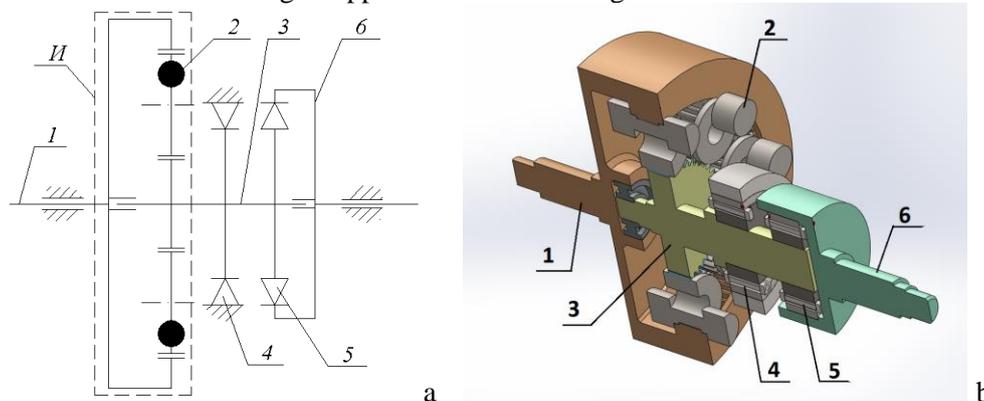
Generalized principle scheme (a) and CAD-model section view (b) of inertial converter
